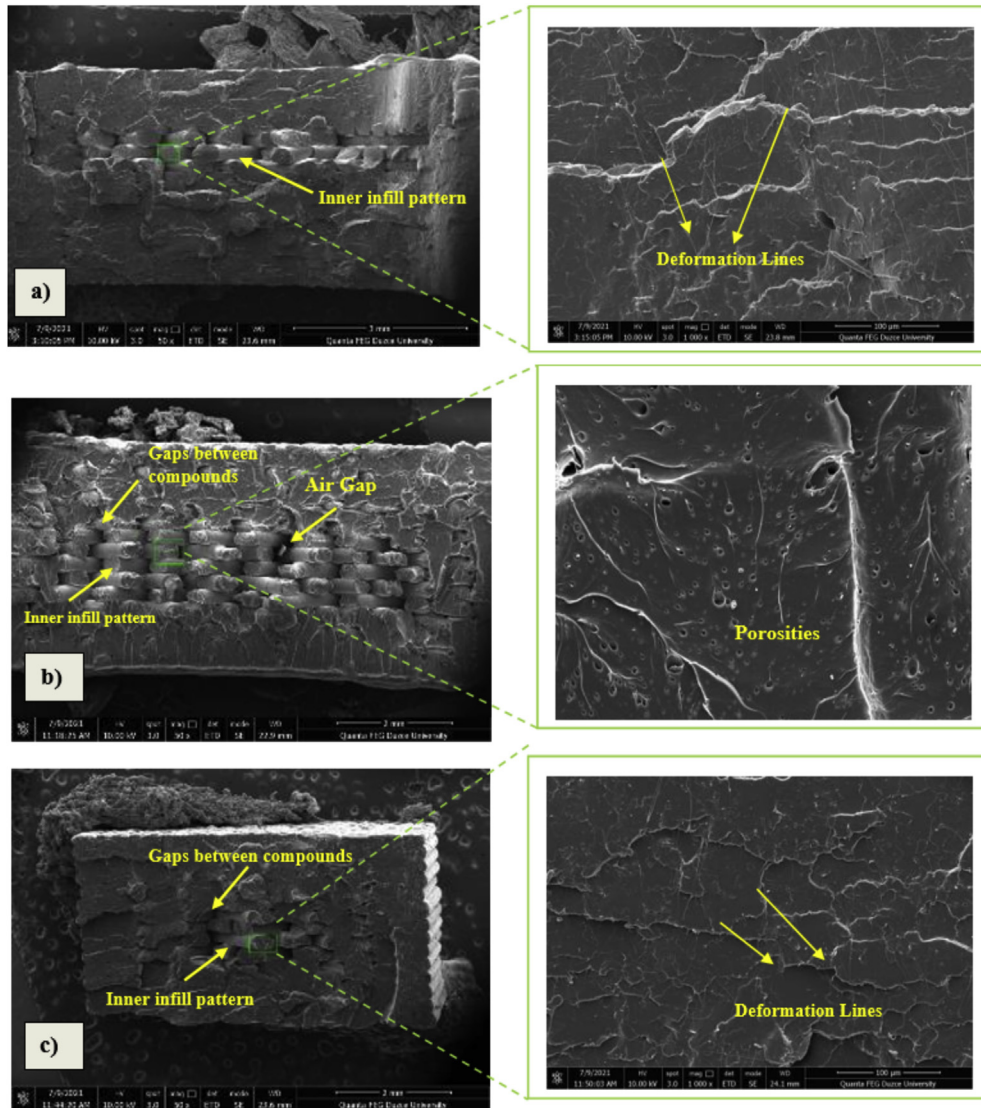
SEM images of the fractured surfaces of the optimum test pieces: a) tensile strength test part b) impact strength test part c) three point bending test part.
